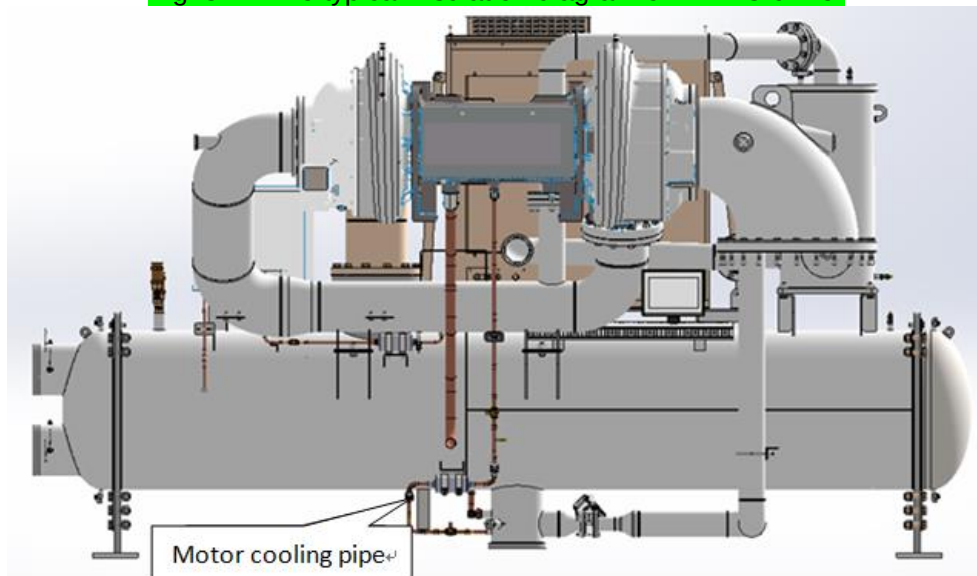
The auxiliary pipes schematic drawing of WMTC chiller
